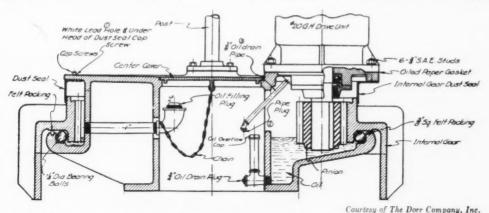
Assembly of the center mechanism of a Dorr Clarifier showing provisions for lubrication.
